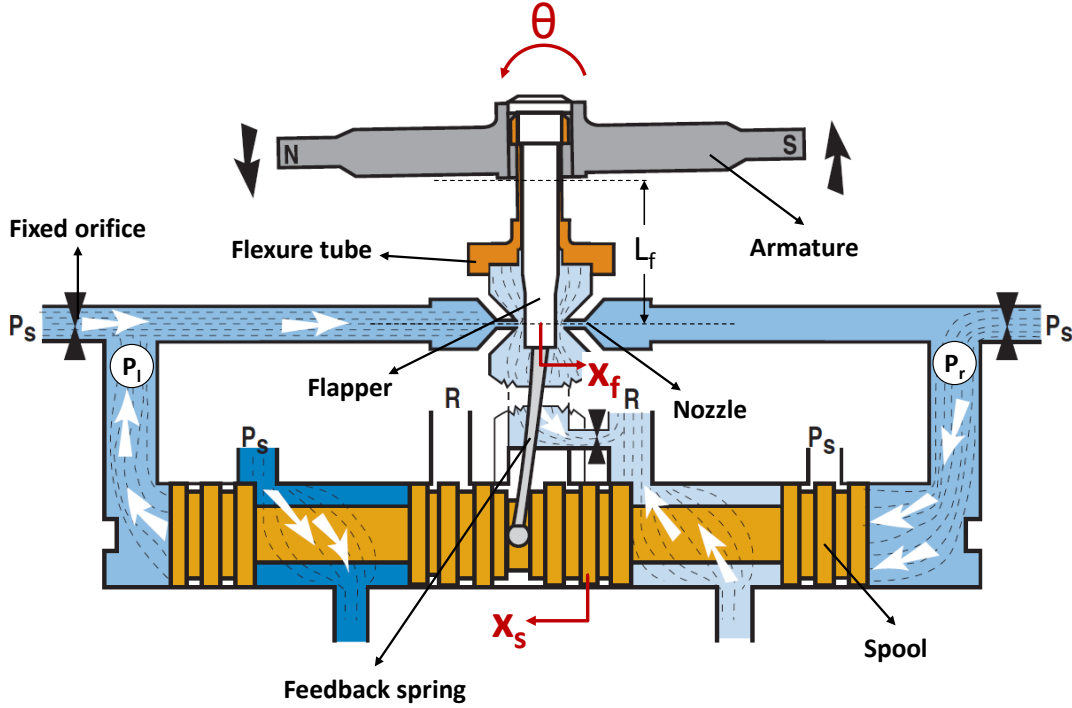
Parts of a double stage nozzle-flapper servovalve [5]
